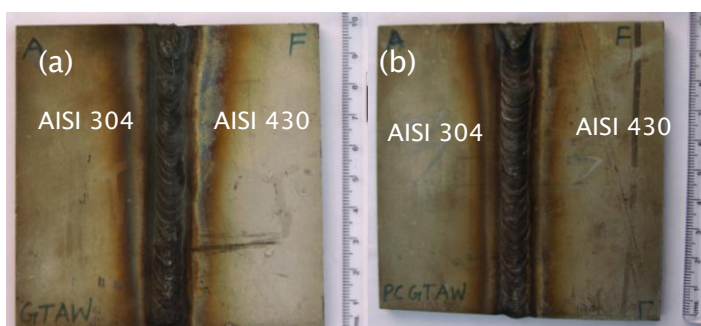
Dissimilar weldments of AISI 304 and AISI 430 using (a) GTAW (b) PC-GTAW process
